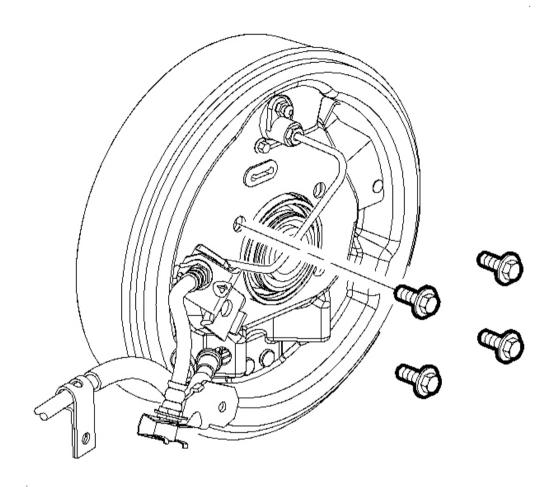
Wheel Bearing/Hub & Mounting Bolts Courtesy of GENERAL MOTORS CORP.
